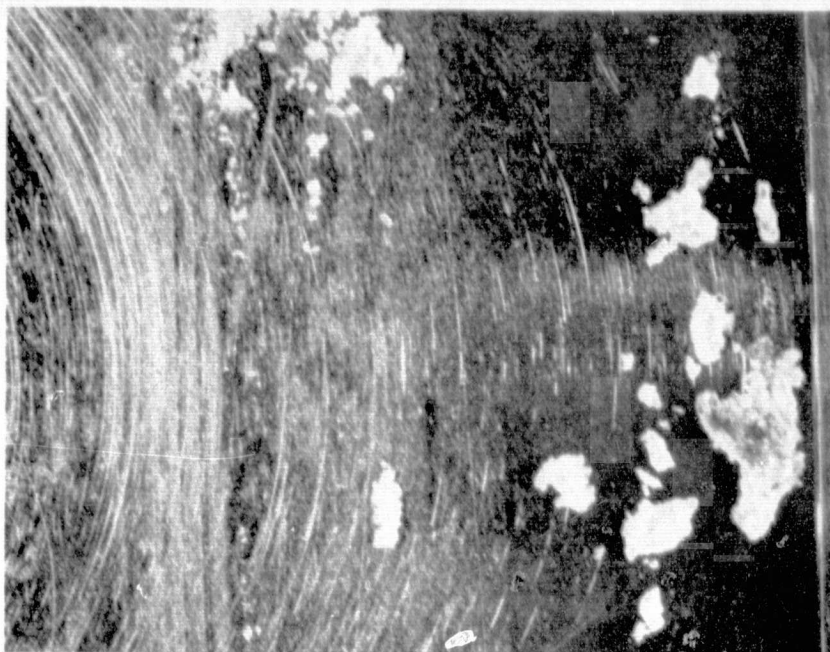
Shaft Seal Surface After Wear-in (20X)
